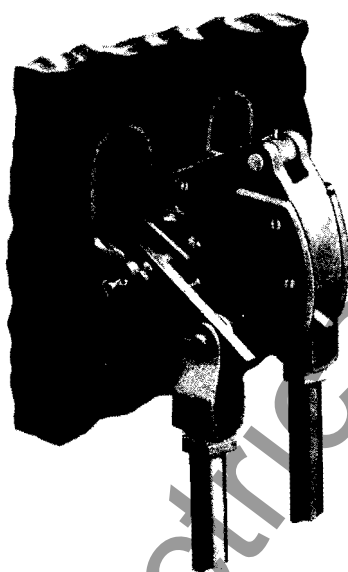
VIEW OF RUNNING SIDE WITH BOTH HANDLES OPEN
